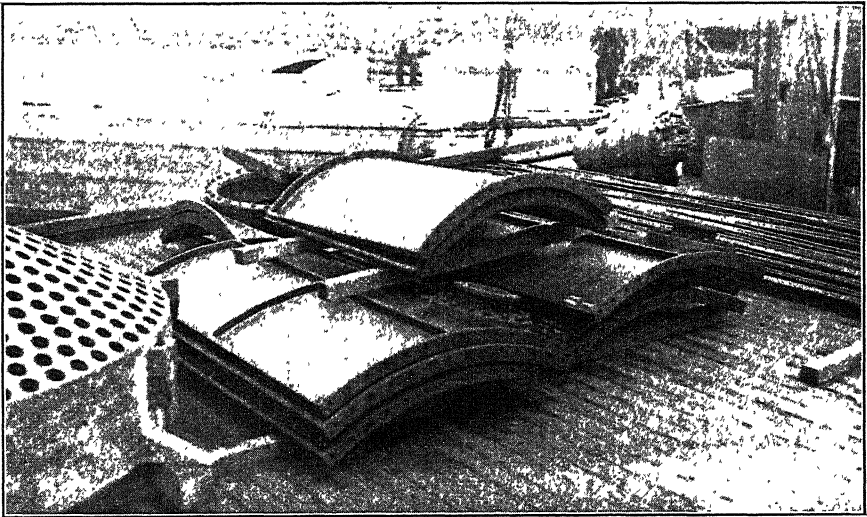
Portions of belt of a 10 ft. 6 in. diam. vacuum pan. The larger pieces are 5 ft. 6 in. \times 9 ft. 0 in. \times 1 ft. 0 in. and weigh 2,200 lb. each.
